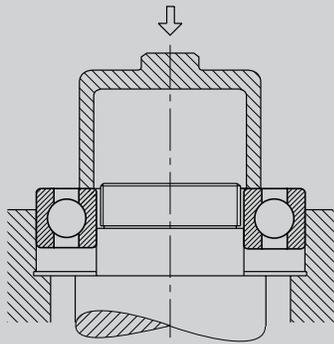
Pressing of a Bearing when Tight-Fitting a Inner Ring
